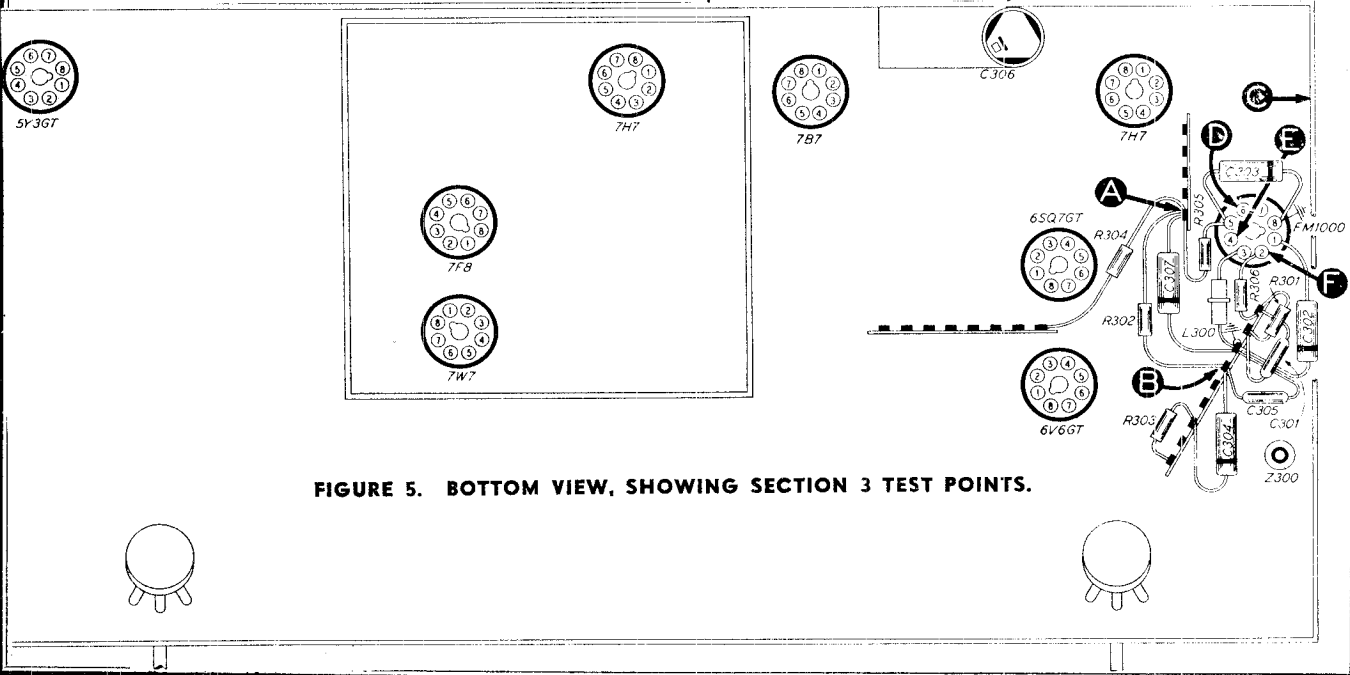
BOTTOM VIEW, SHOWING SECTION 3 TEST POINTS.
